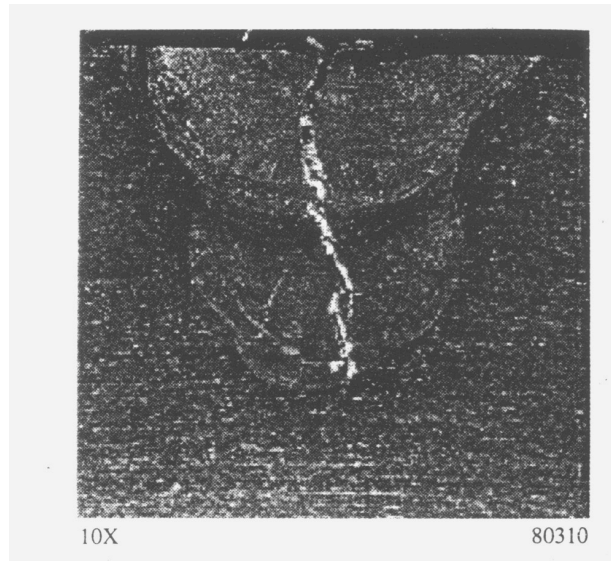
Weld solidification (WS) crack in AISI 304 type stainless steel. (Watson et al., 1996)
